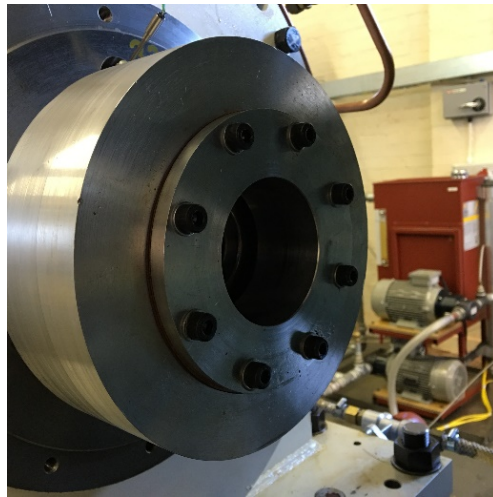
Speed increasing gearbox, after disassembling shaft
